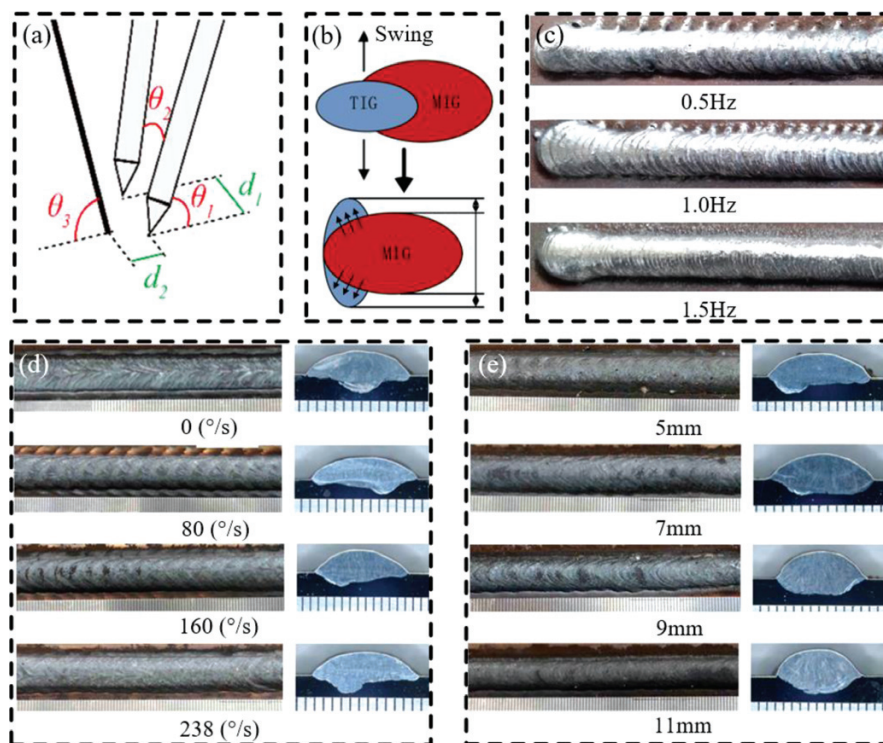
a) Schematic diagram of the relative positions of tungsten electrode and wire²², b) Schematic diagram of oscillating TIG-MIG hybrid molten pool, c) comparison of weld bead at different oscillation frequencies²³, d) shape and cross-section of weld bead at different oscillation speeds and e) at different distance between wire and tungsten²⁴
